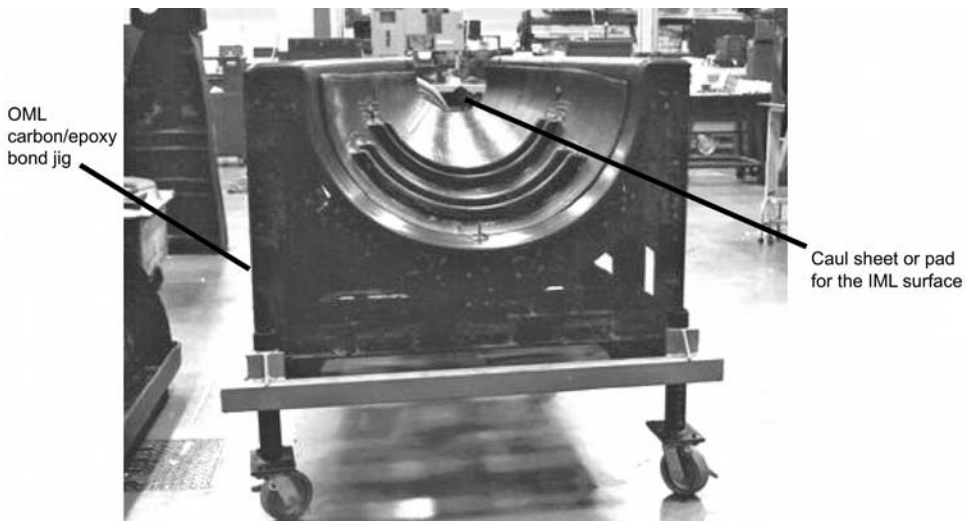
Elastomeric caul plate or pad. IML, inside moldline; OML, outside moldline. Source: The Boeing Company
